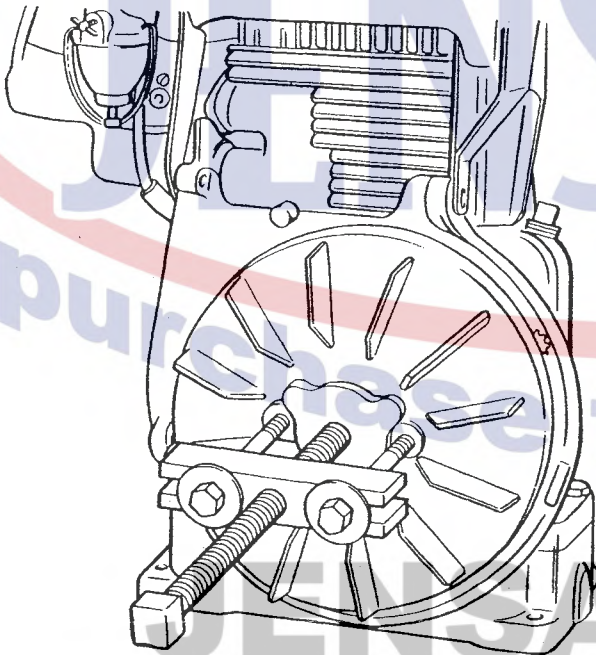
REMOVE FLYWHEEL WITH PULLER
